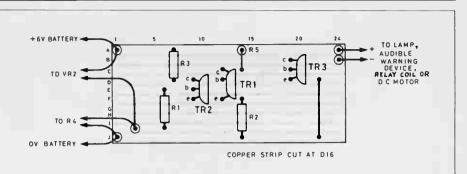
Stripboard components layout for the Light Triggered Switch.
